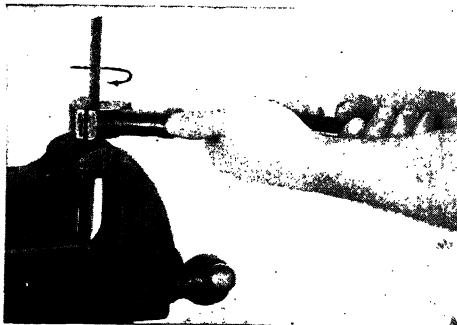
Shearing a metal bar with a vise and a monkey wrench
